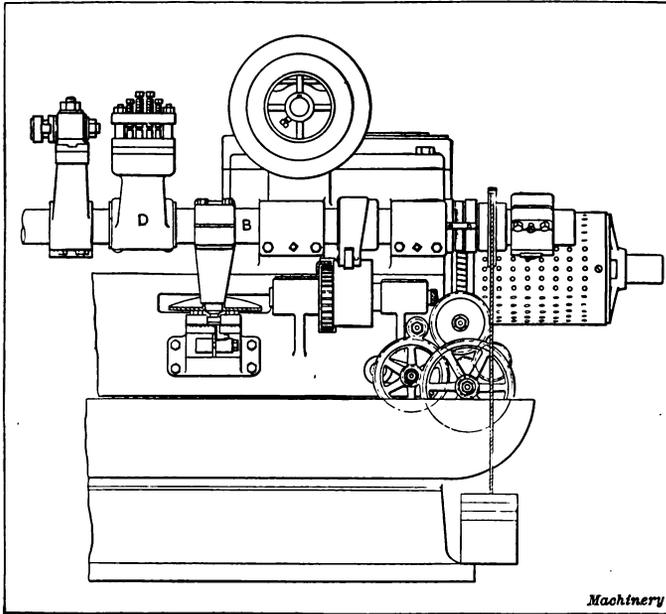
Rear View of Head End of Fay Automatic Lathe
